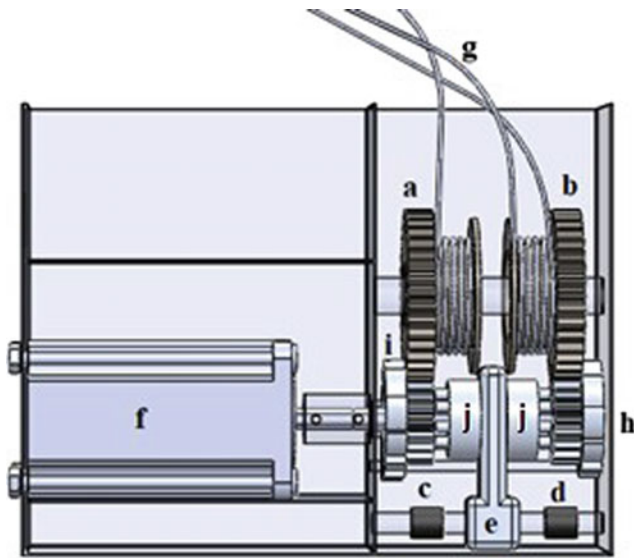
a Gear 1; b gear 2; c electromagnetic pin 1; d electromagnetic pin 2; e gear wheel; f motor; g cable; h locking system 1; i locking system 2; j gear wheel cylinder
